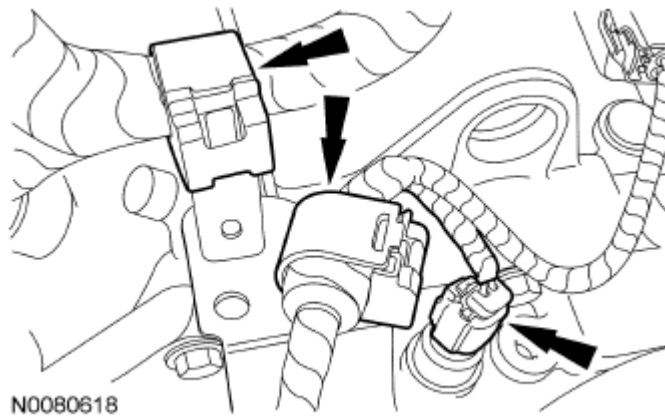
Locating Wiring Harness Retainers And Reversing Lamp Indicator Switch Electrical Connector
